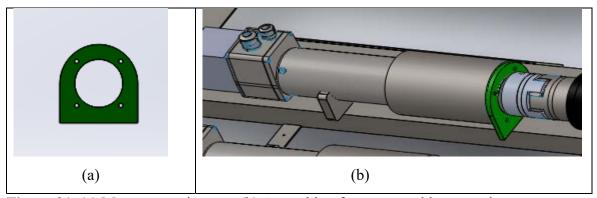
(a) Motor mounting part (b) Assembly of a motor and its mounting part.
